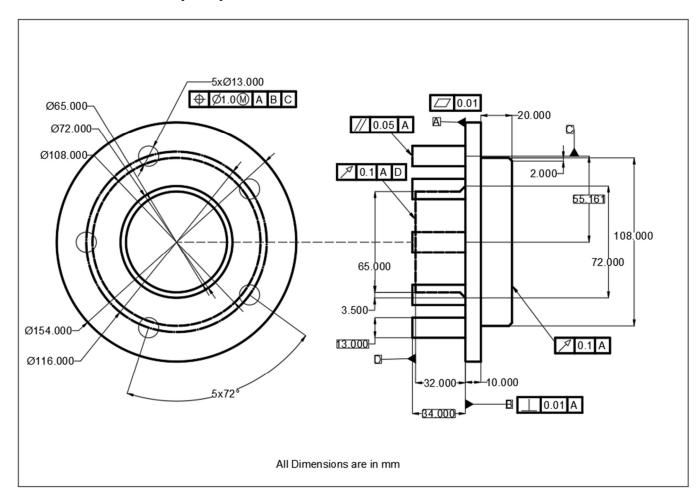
Functional gauge for the centerplate bolt pattern lug nuts holes, Dimensions as per $\mbox{GD\&T}$
